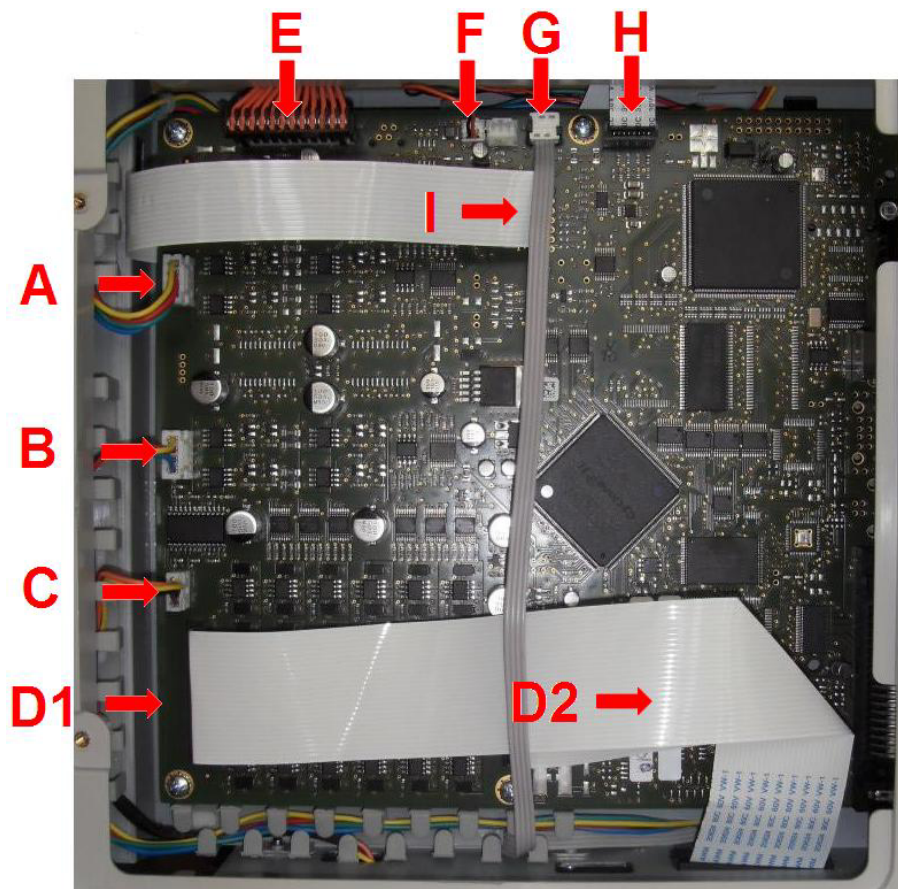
Main Board Assembly removal
